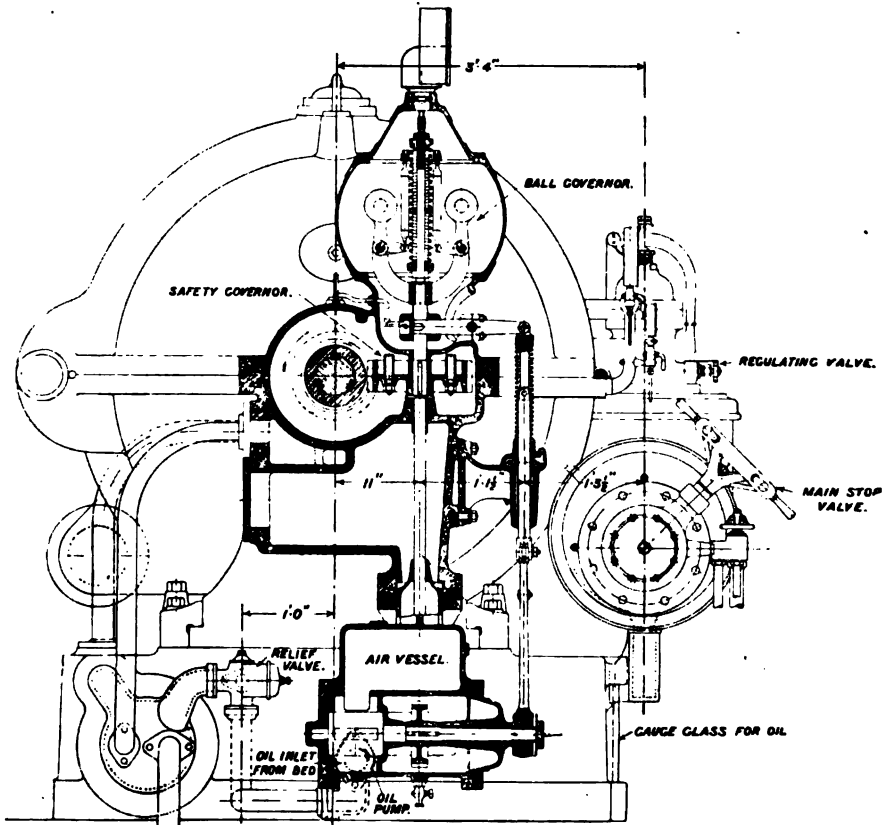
Cross-section of 1000-K.W. Brush-Parsons Steam Turbine.
